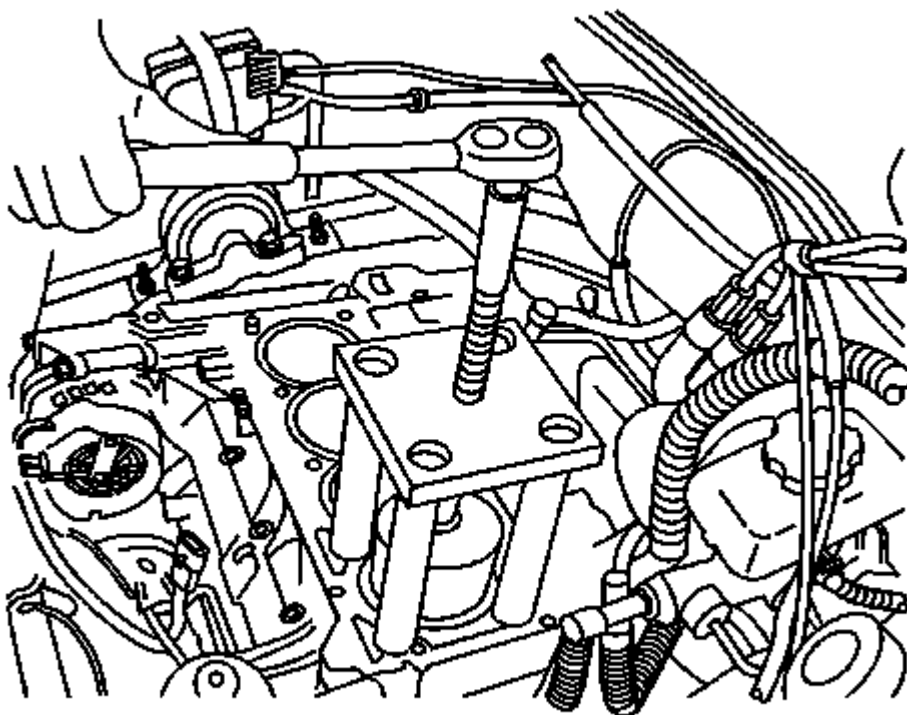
View Of Cylinder Bore Sleeve Installer Assembly
